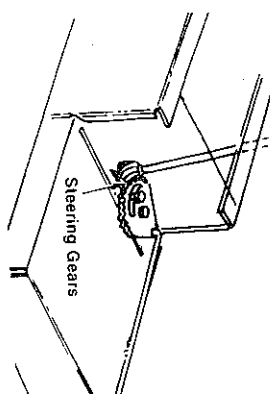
is shown with the unit tipped up on rear wheels for clarity only.
